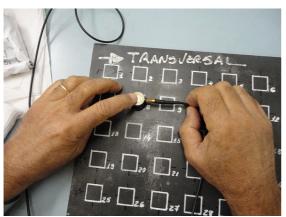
Test specimen taken from the steel coil being inspected ultrasonically
